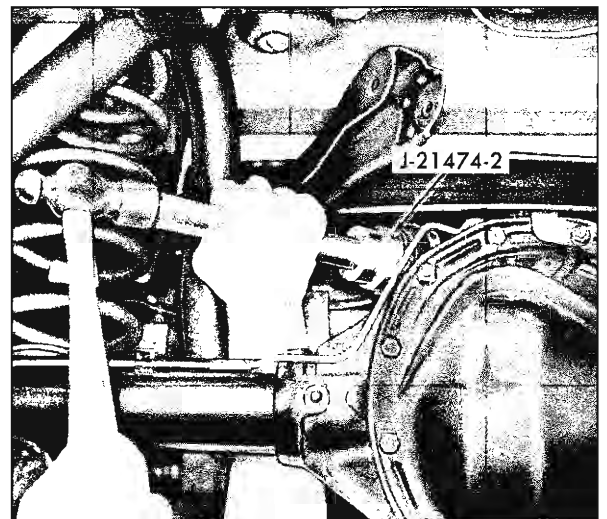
Carrier Mounted Suspension Bushing Installation (Heavy-Duty)
